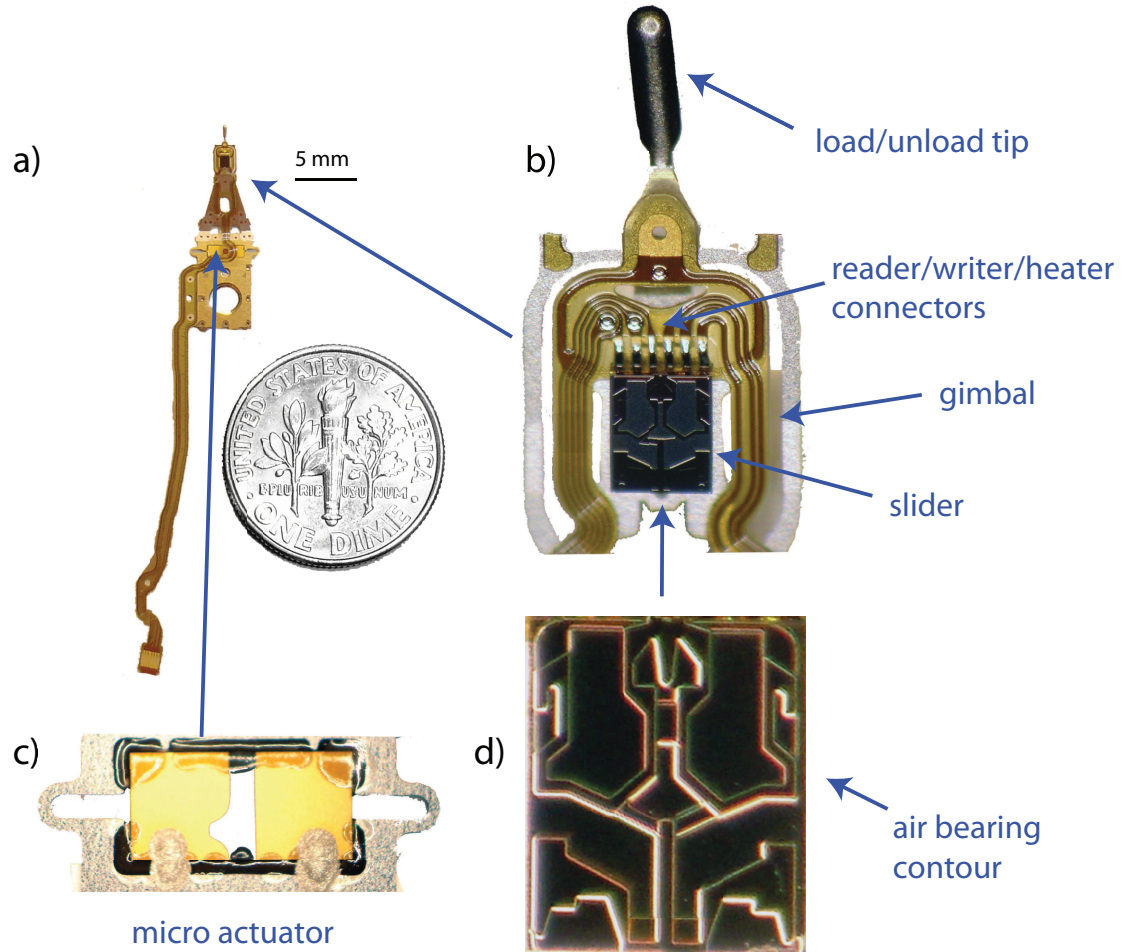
a) Head-gimbal assembly in a dual-stage actuator hard disk drive and magnified views of b) the tip of the head-gimbal assembly, c) micro actuator and d) air bearing surface
